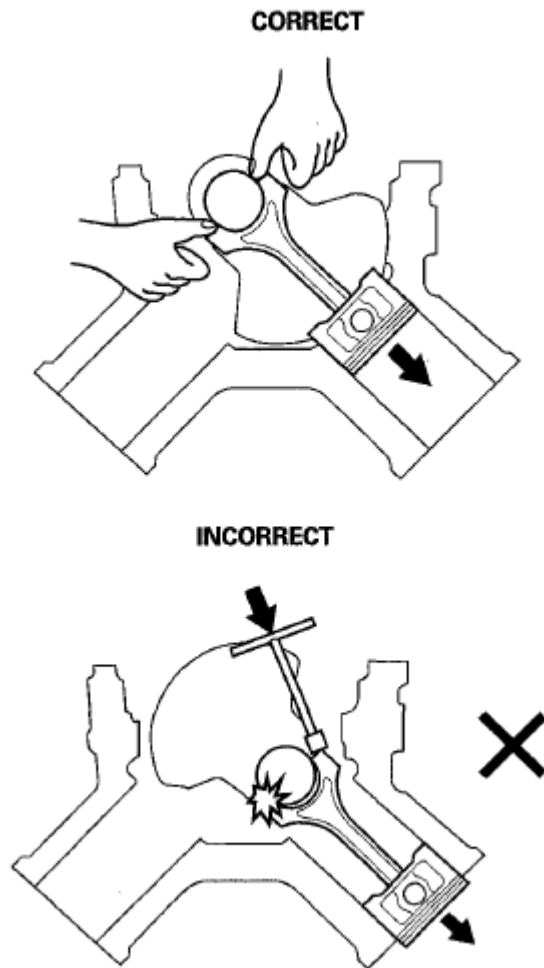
Identifying Connecting Rod Correct & Incorrect Position
